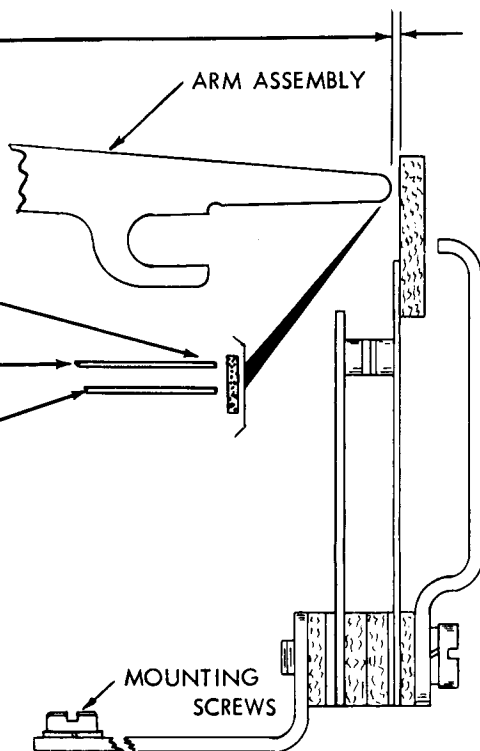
START-STOP SWITCH ASSEMBLY
